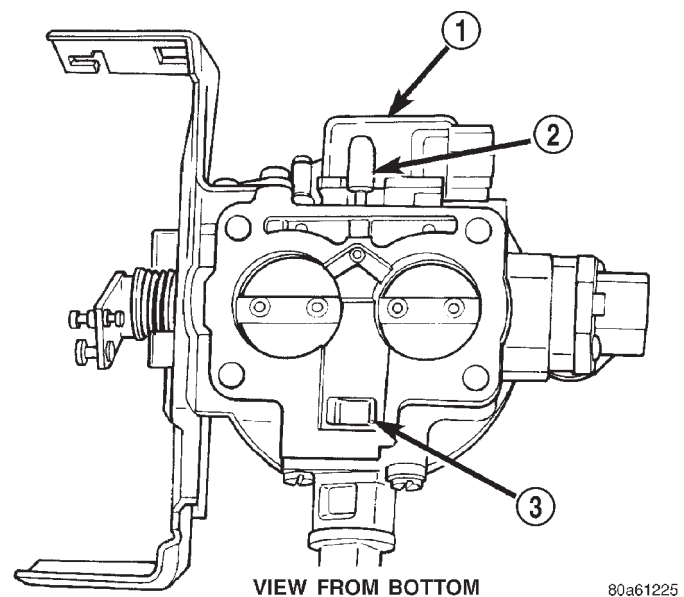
MAP Sensor L-Shaped Rubber Fitting—5.9L Engines
